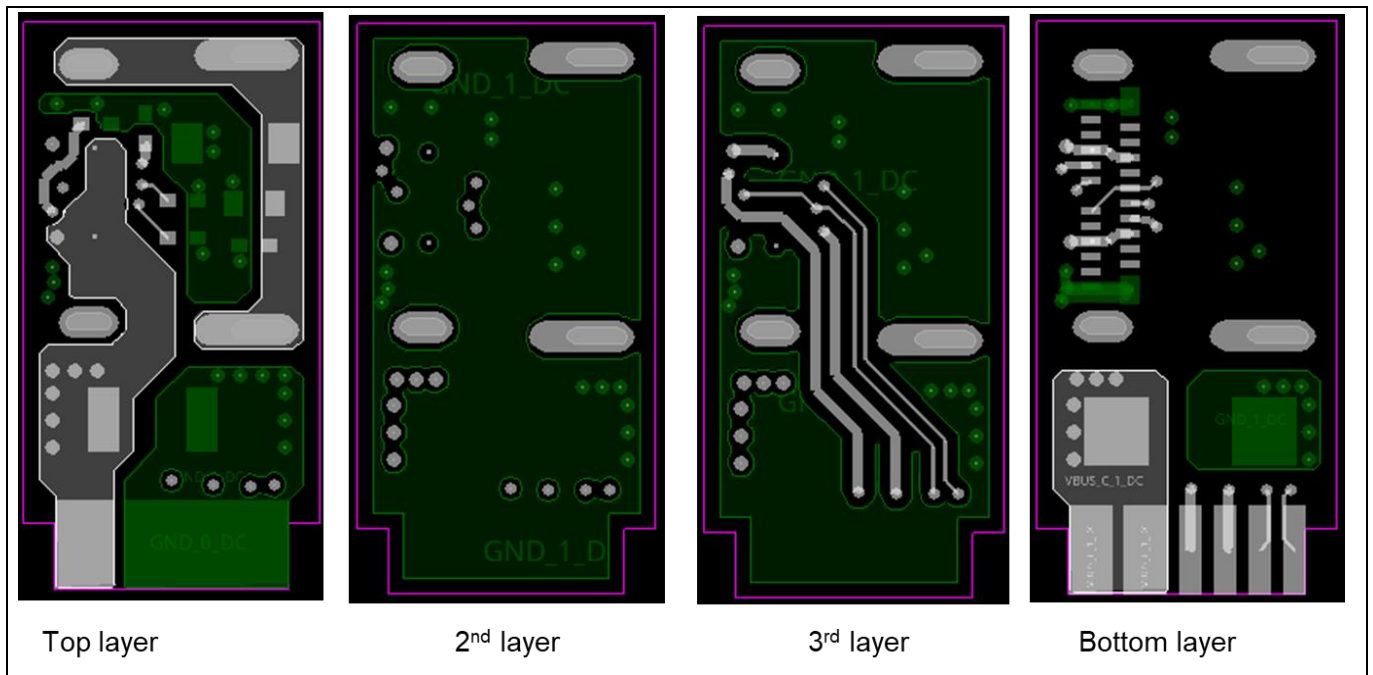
CLA solution demo (SD2230-3-R3) board – Port #1 Mushroom board PCB layout
